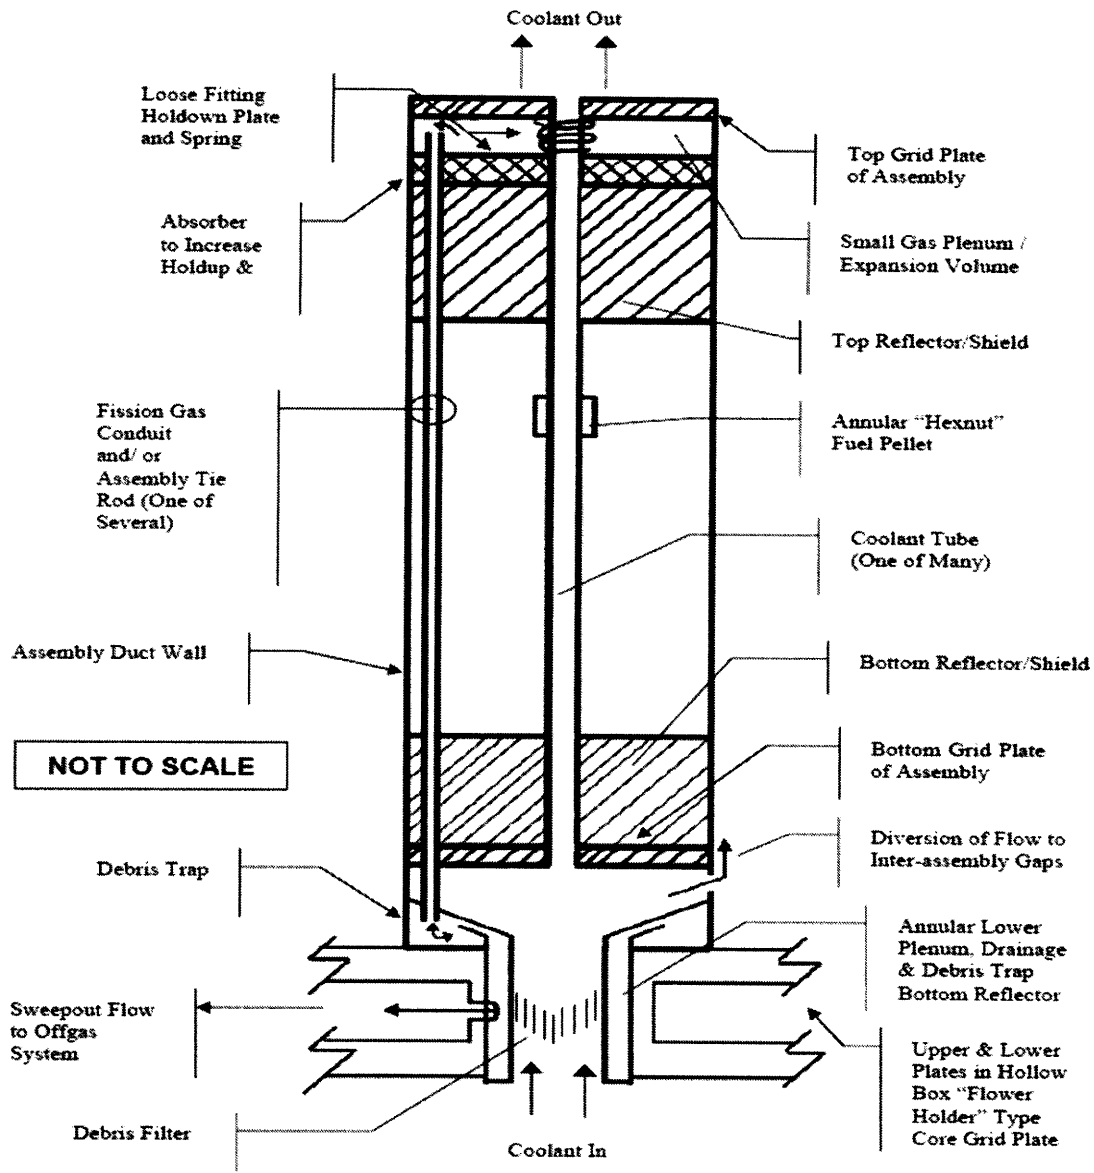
Vertical Cross Section of a Tube-in-Duct (TID) Fuel Assembly
